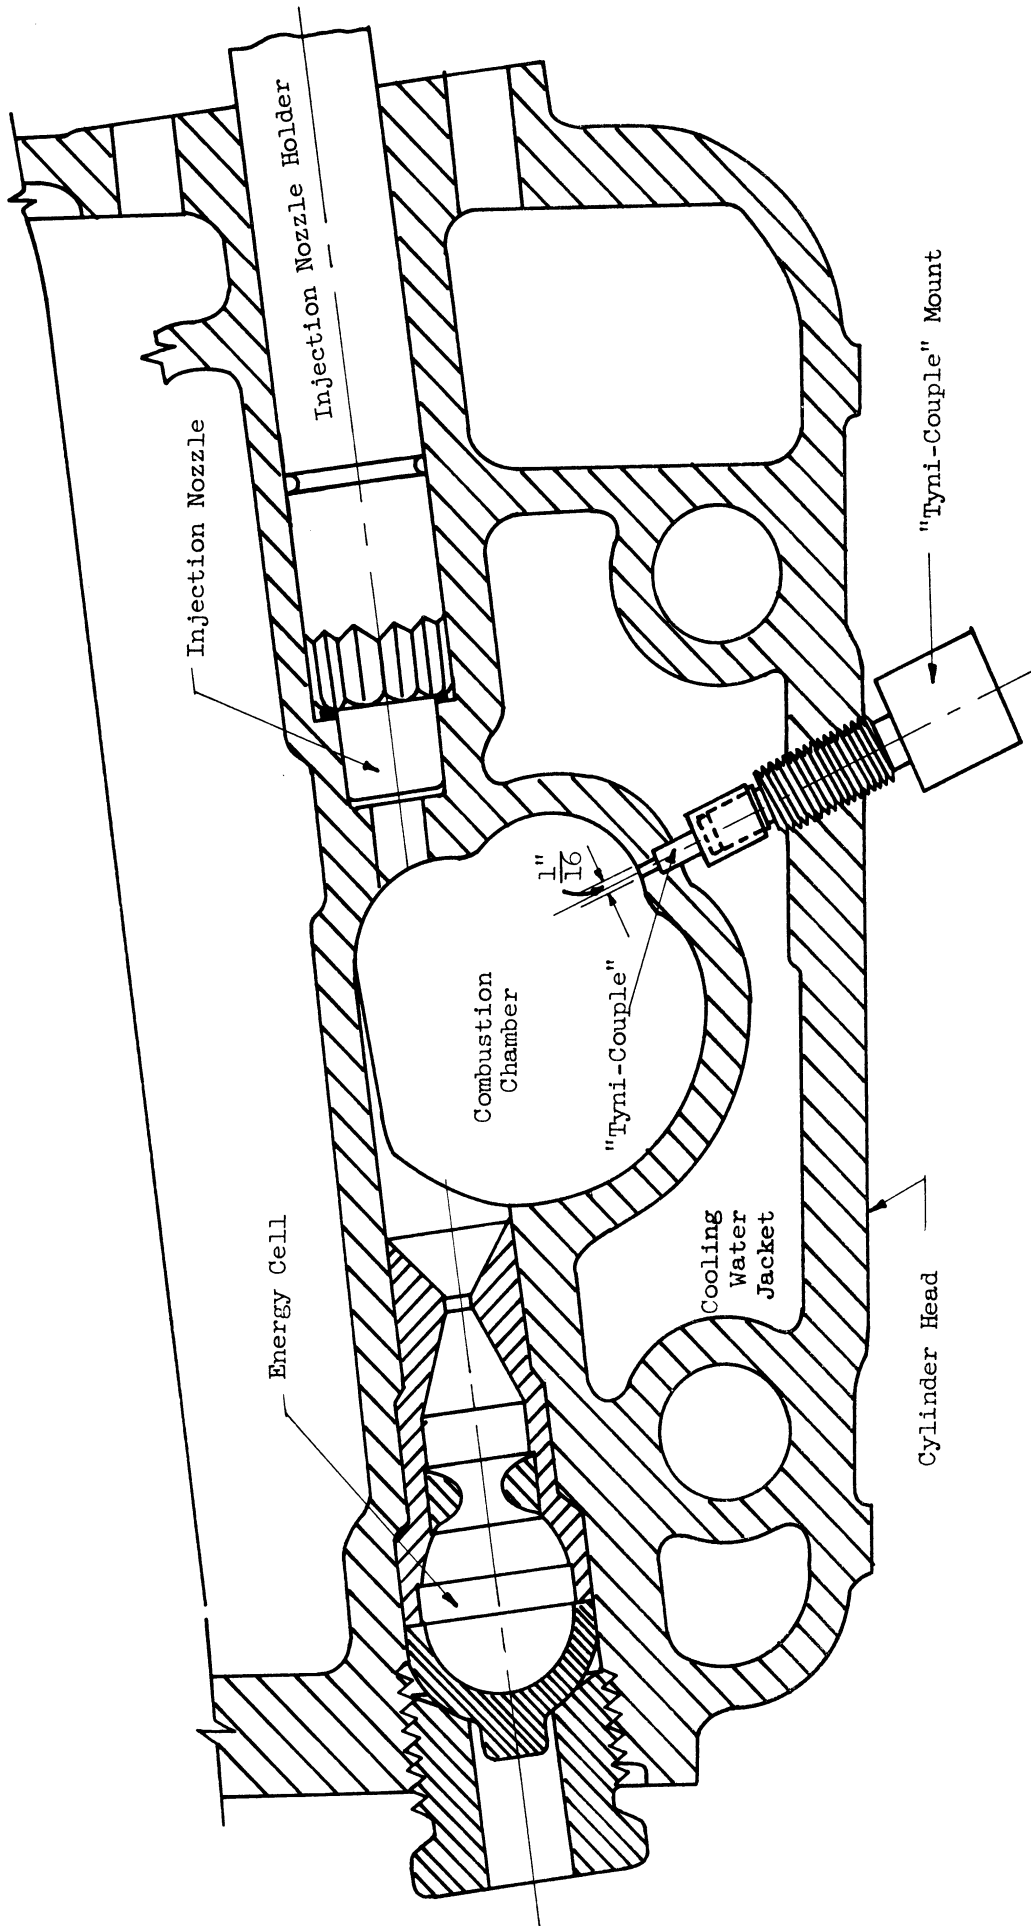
Sectional Plan of Cylinder Head Showing the Combustion-Chamber Thermocouple.
